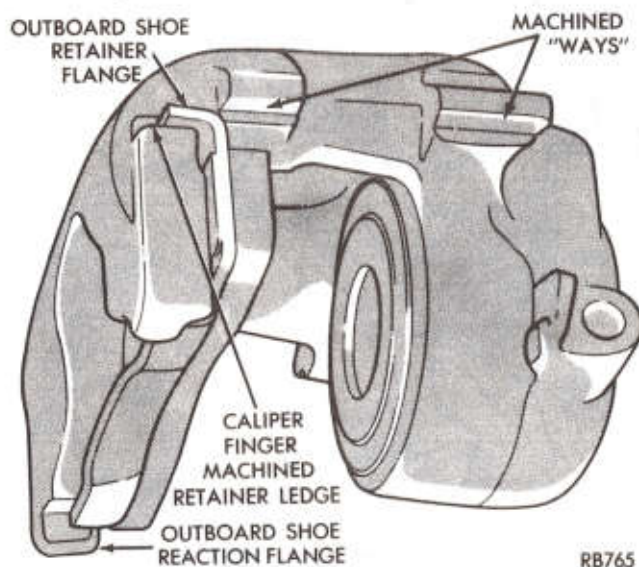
Caliper and Outboard Shoe Retainer Flange
